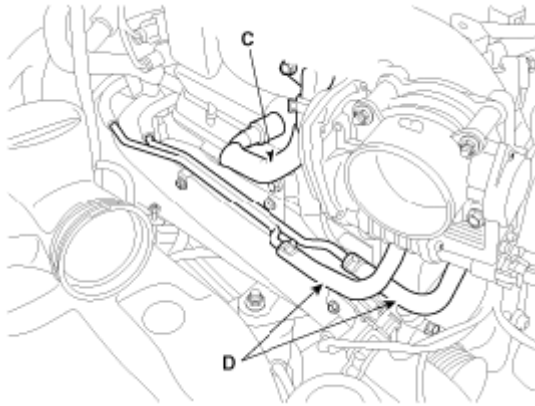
Identifying Positive Crankcase Ventilation (PCV) Hose And Electronic Throttle Control (ETC) Cooling Hoses
